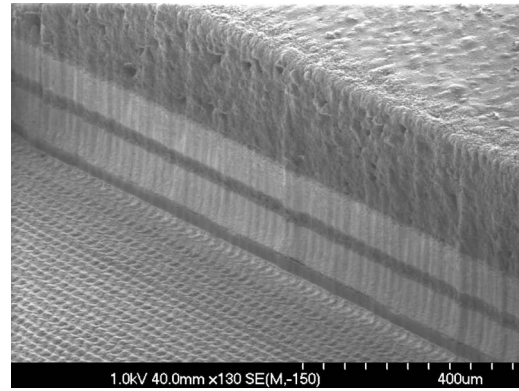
Tilted view on one edge of the area machined with a 355 nm DPSS laser through the molding compound and the two upper silicon dies (dies 2 and 3)
